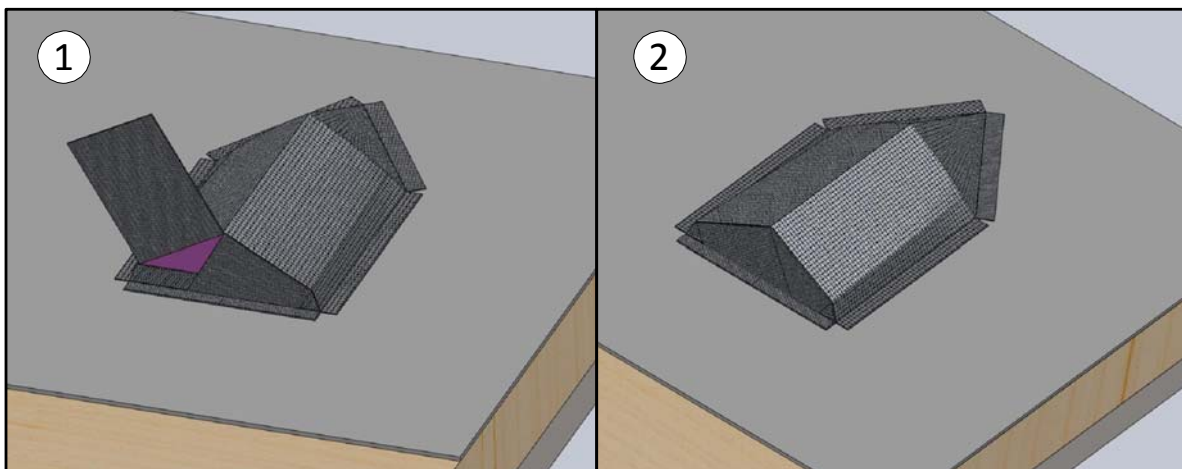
Finish folding the stern- (1) Fold one flap down and cut excess off. (2) Fold the second flap down to finish matting the plug. Leave extra matting around the plug. This will be cut off after the resin dries.
